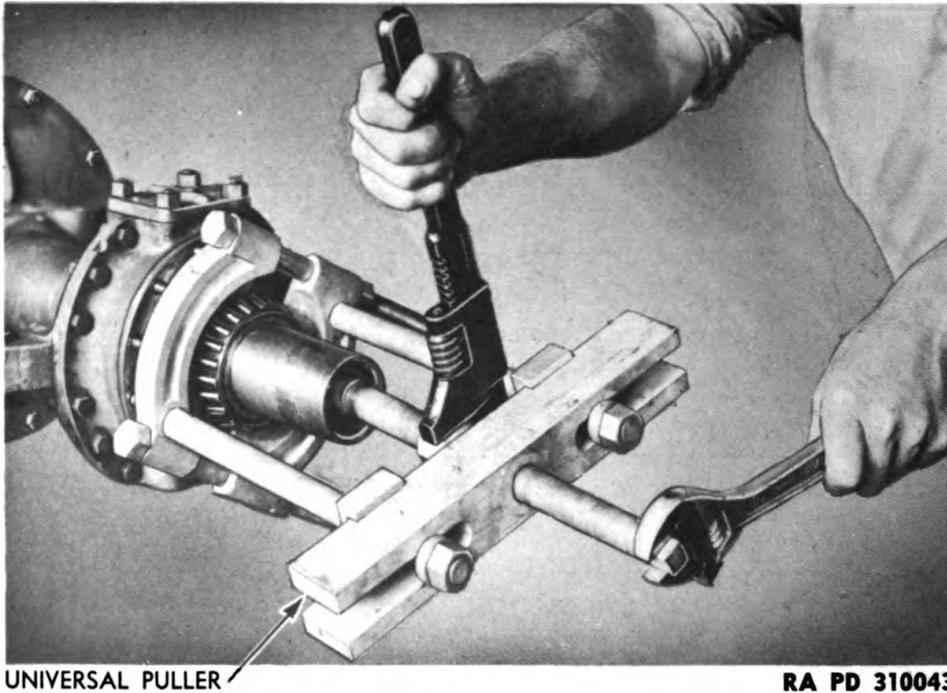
Removing Front Wheel Inner Bearing Cone (6x6)
